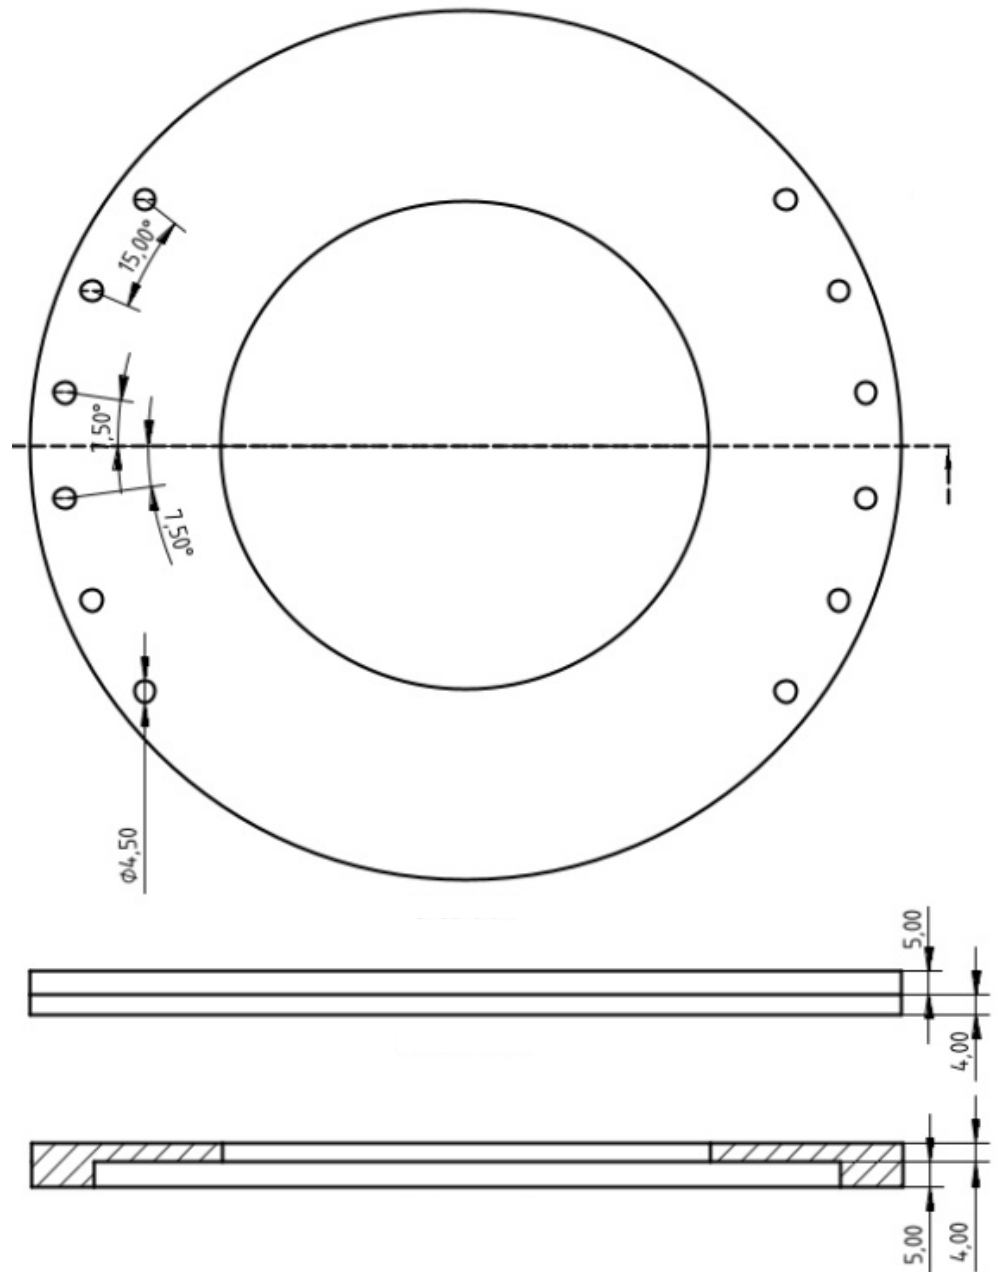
Technical drawings of the lower casting frame in the biofilm module in top view (top), side view (middle), and cross-section (bottom). Dimensions in millimeters and degrees.
